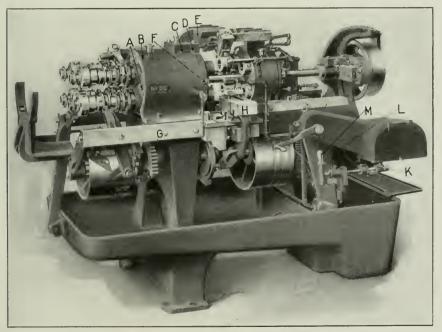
Acme Multiple-Spindle Automatic Screw Machine
